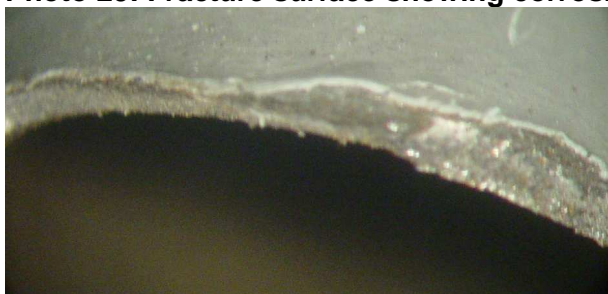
Fracture surface, cabin truss (stereo)
